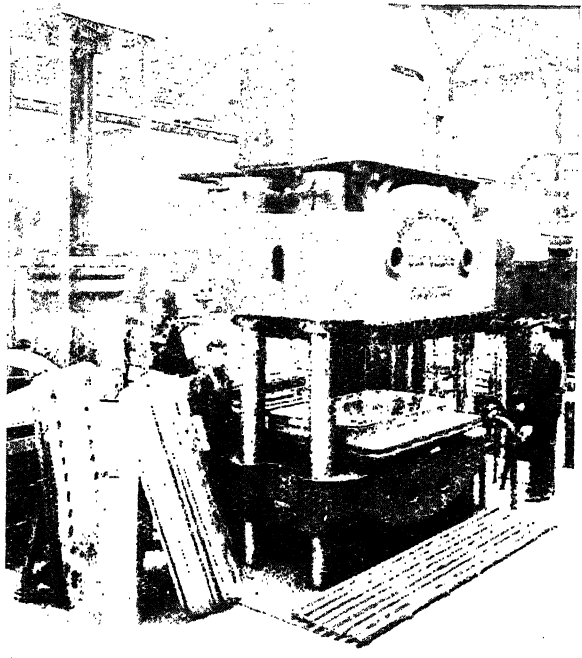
A RUBBER PRESS FOR FLANGING THE EDGES OF PANELS, FORMERS, RIBS, AND OTHER PARTS. (*J. Shaw & Sons Ltd.*)
